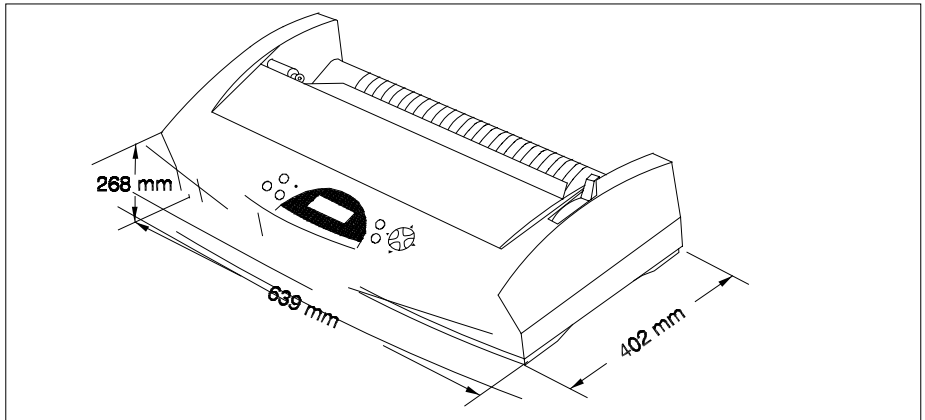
Dimensions of the tractor feed printer DPR 01 (design example)
